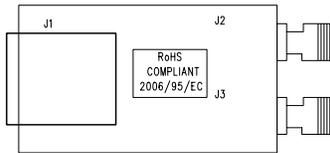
shows the adapter board drawing with the silkscreen annotations. The 1.75 by 1.0 inch, four-layer PCB is designed to bring RJ45 connector signal pins to SMA connectors. There is only one SMA pair installed (J2 and J3) on the board. J2 connects to the pin 4 of the RJ45 connector (J1); J3 connects to the pin 5 of J1. The end user may access the remaining RJ45 pins using the copper pads located on the bottom of the board.
